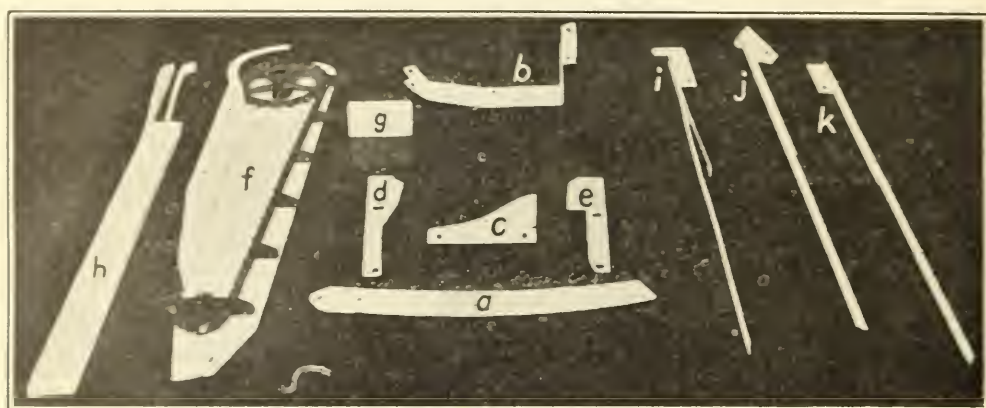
Separate parts of low-cutting attachment for Case-Osborne corn binder: *a*, Stationary knife; *b*, knife bracket, with connecting plate attached; *c*, elevating chute; *d*, *e*, right and left side knives recut; *f*, special chain board with special gatherer chain and sprockets, backing strips, strippers, and connecting bracket; *g*, support block for special chain board; *h*, special backing board, with regular strippers; *i*, *j*, *k*, upper front, lower special, and under front throat springs with special brackets
